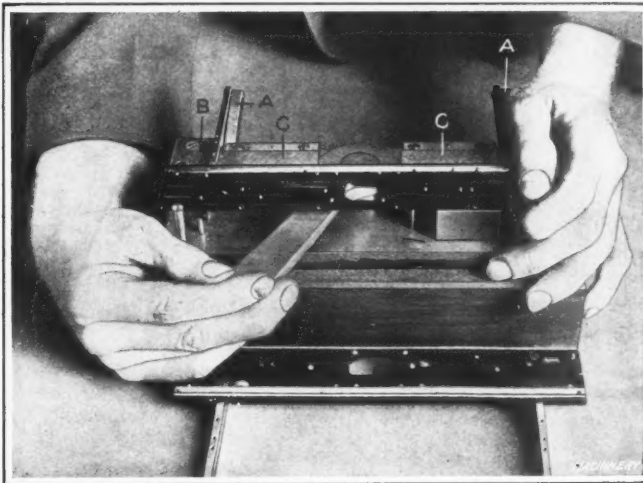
Fixture for assembling Folding Arms to Carriage Bed Plate
